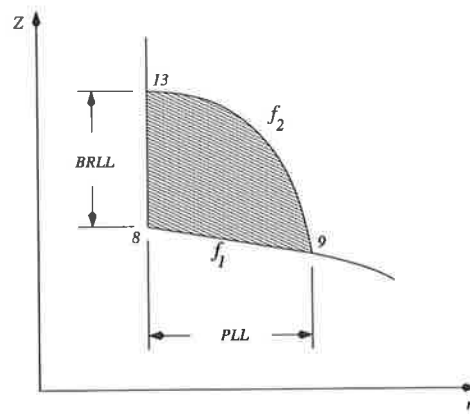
Parabolic weld bead profile for a branch on pipe weld.
